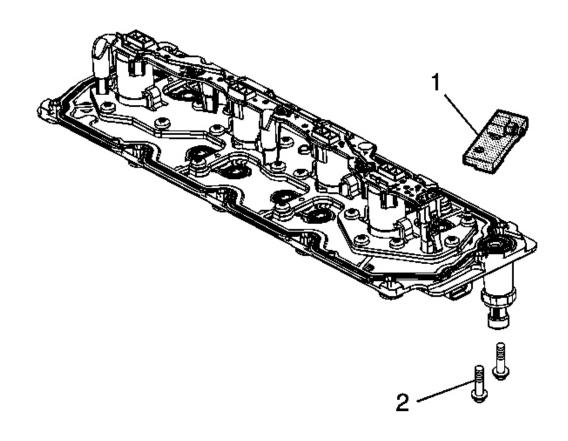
Displacement-on-Demand Tester Air Adapter Courtesy of GENERAL MOTORS CORP.
